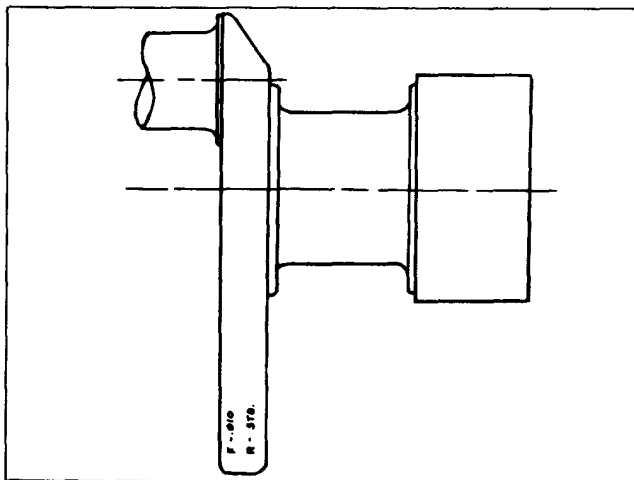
, (N101140). Oversize thrust bearing mark on crankshaft
